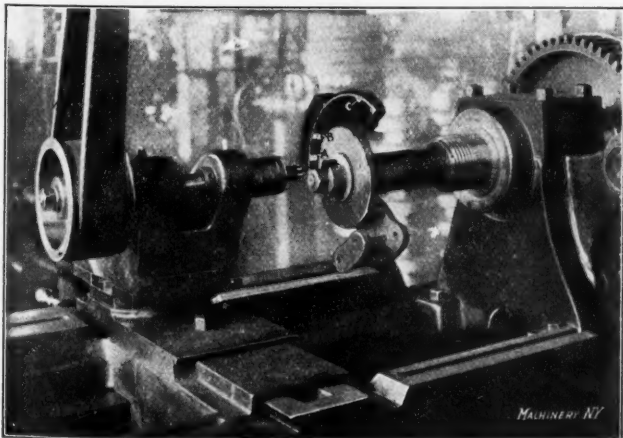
Milling Contact Spots on Countershaft Friction Parts
